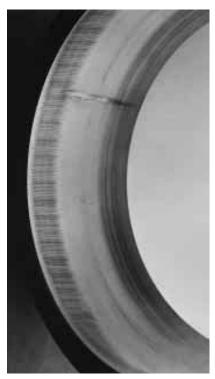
Fluting, caused by the passage of electric current, in the outer ring of a spherical roller bearing
